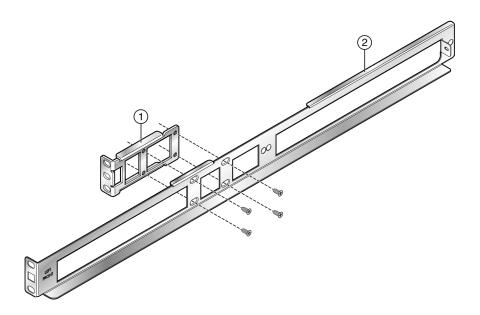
Attaching the Mounting Brackets to the Rails (Left Rail Example)
